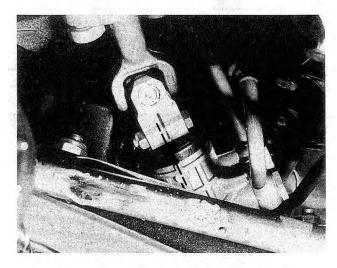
Marks on steering gear housing align as shown when steering gear is centered and front wheels are in straight-ahead position.
